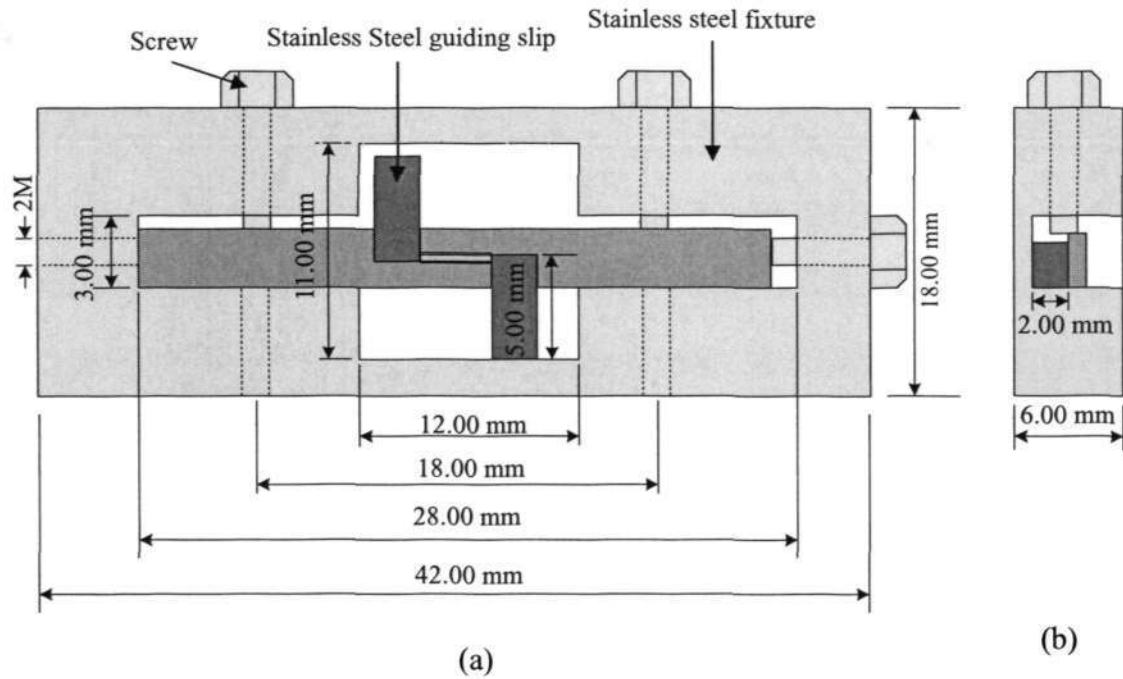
The schematic diagram of the stainless steel fixture used to align the solder/copper joint specimen during reflow process. (a) plane view and (b) side view
